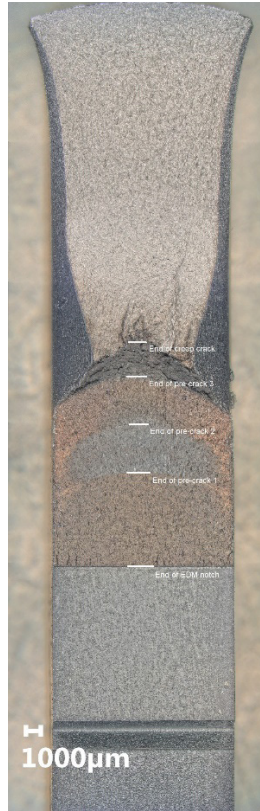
Fracture surface of Alloy 709, CCGR Test 1.
